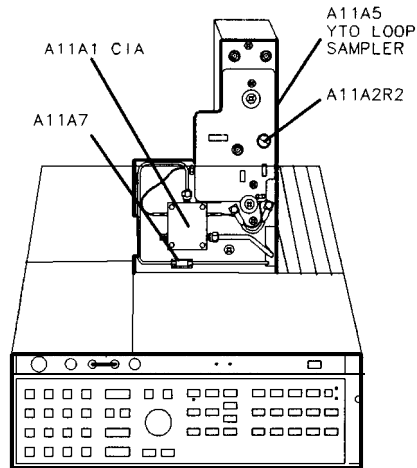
Location of Assemblies, Cables, and Test Points
